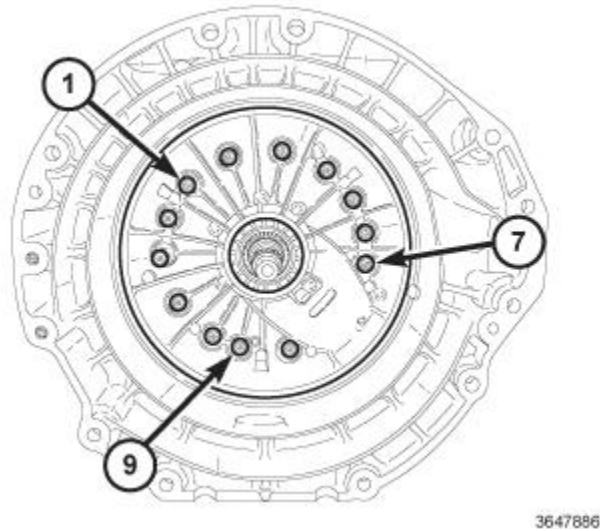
Pre Tighten Bolts One, Seven And Nine
